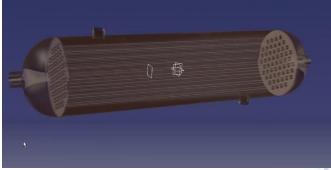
Tube and shell heat exchanger inner view Table 3: Experimental cases
